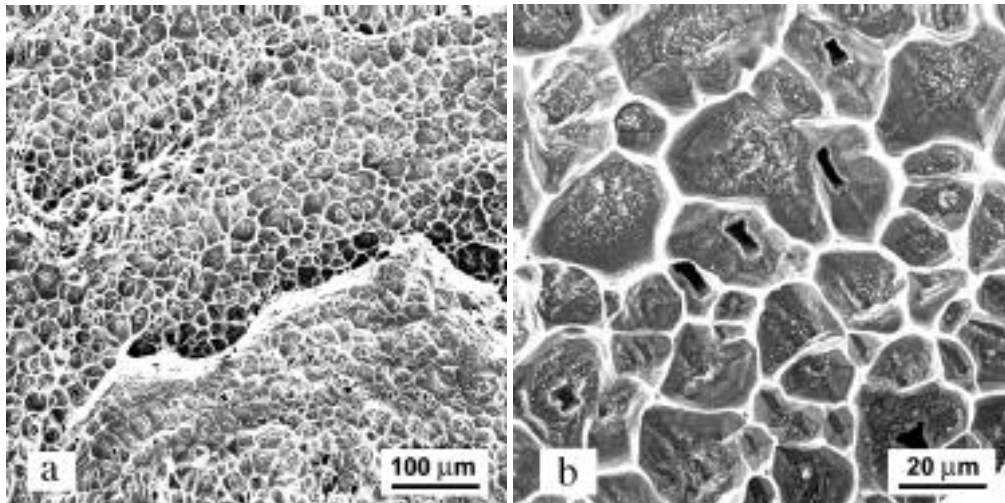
Details of the fracture surface showing (a) ductile dimpling, and (b) Y-rich particles at the bottom of the dimples
